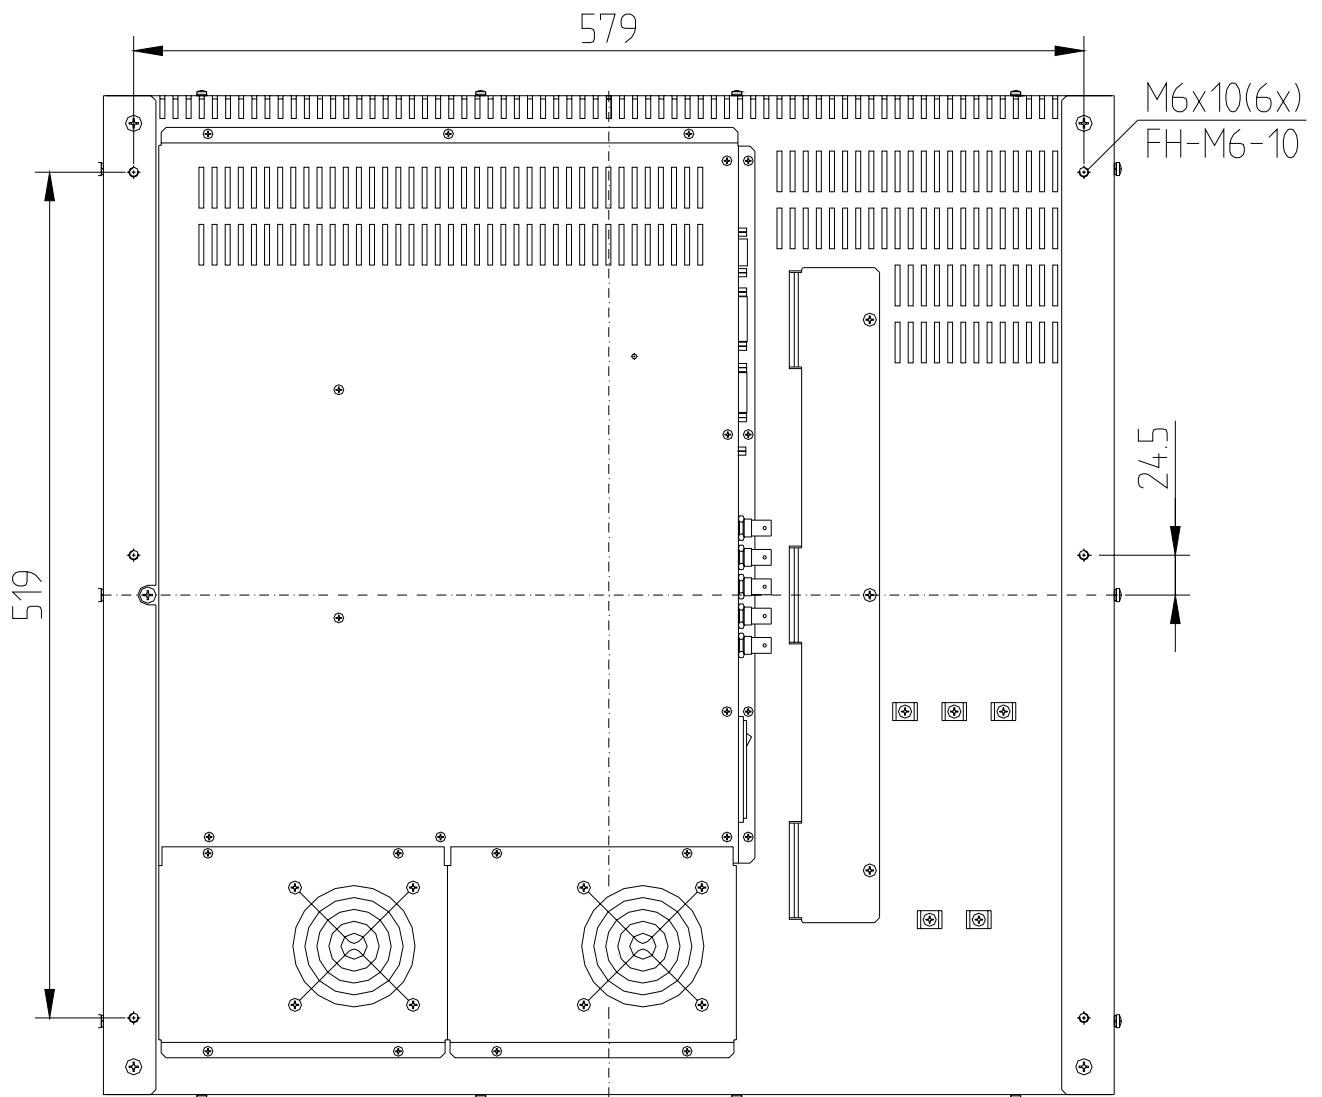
Raptor SQ2801 Dimensions (Chassis version); Rear View
